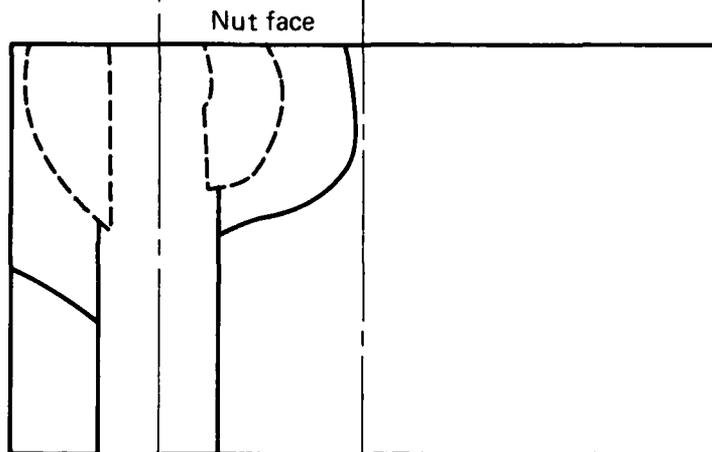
(b) FRACTURE SURFACES: SPECIMENS TYPE (C)
